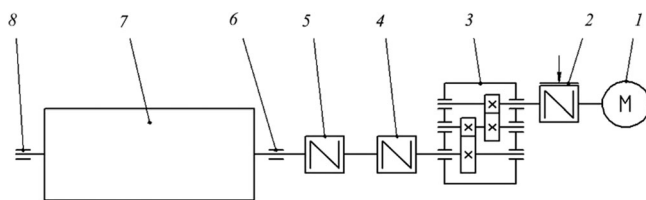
Kinematic scheme of the ball mill CMM2061 before reengineering: 1—electric motor; 2—brake coupling; 3—reducer; 4, 5—gear couplings; 6, 8—bearing assemblies; 7—mill
